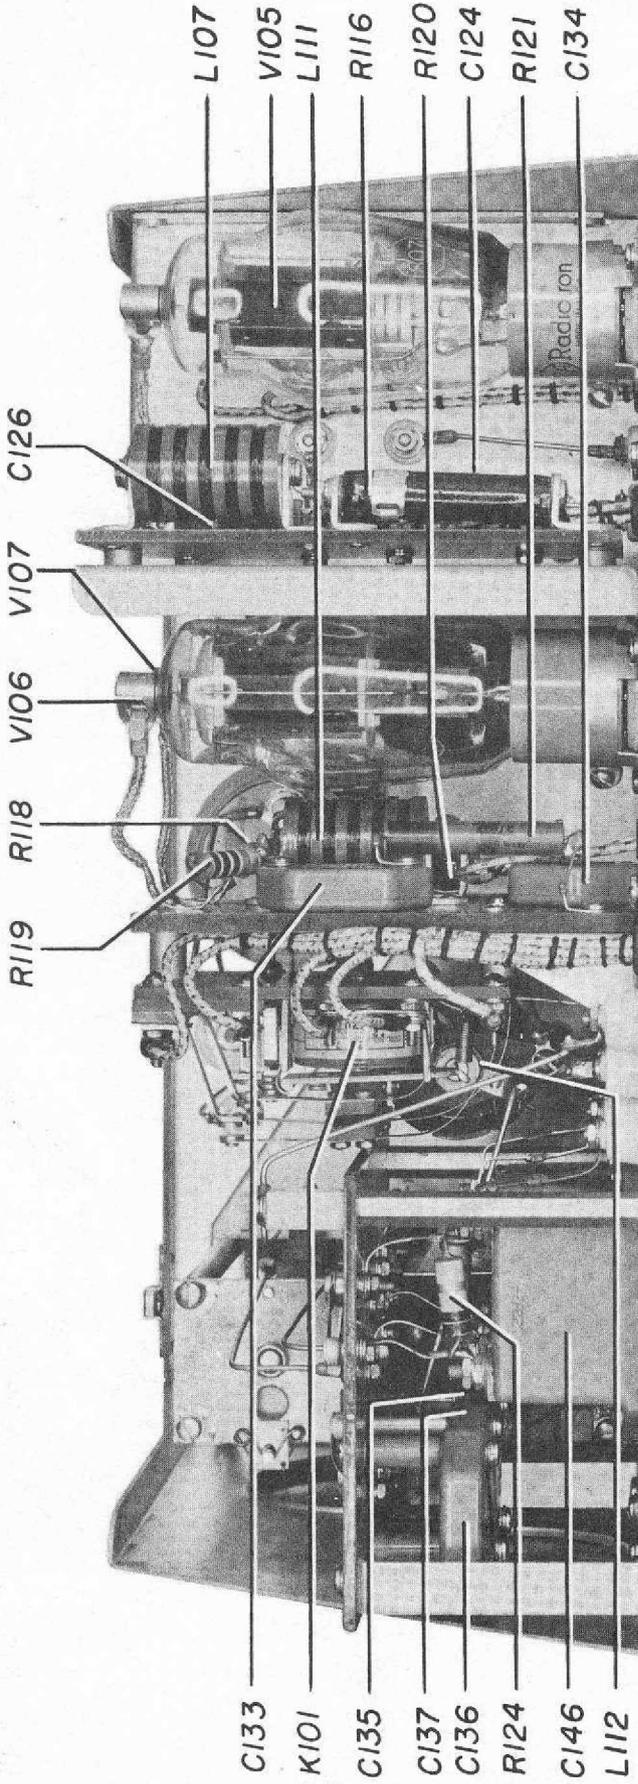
REAR VIEW TYPE TA-12B TRANSMITTER
